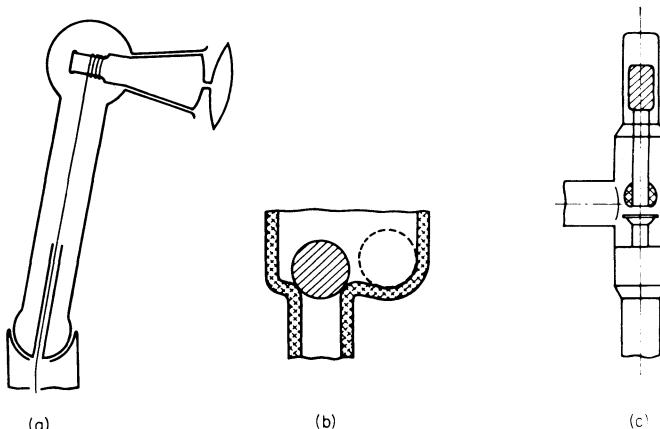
Spherical joints for (a) motion transmission; (b) cut-off; (c) all glass valve seal
